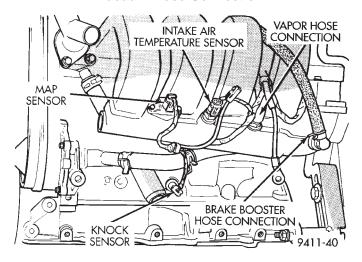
Intake Manifold Electrical Connectors and Vacuum Hose Connections
